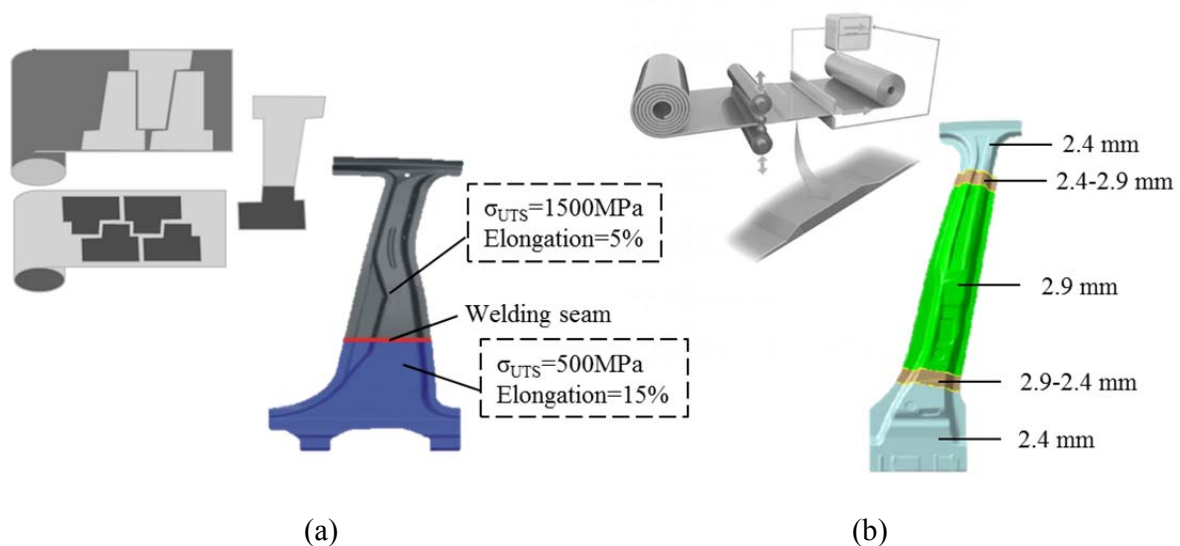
Schematics illustrating the manufacturing of hot stamped B-pillars from (a) tailored welded blanks (TWB) [29, 75], and (b) tailored rolled blanks (TRB) [80, 81]
